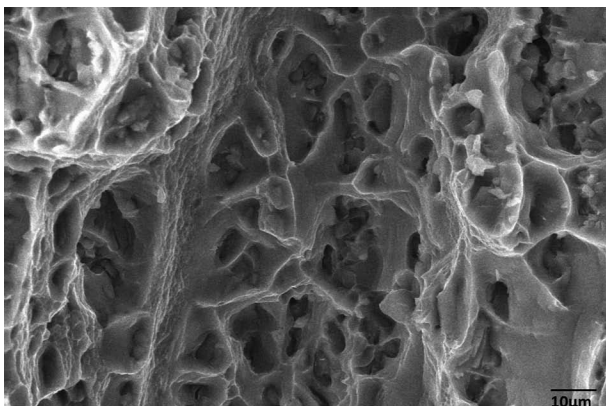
High magnified image of fracture surface shown in Fig. 225
